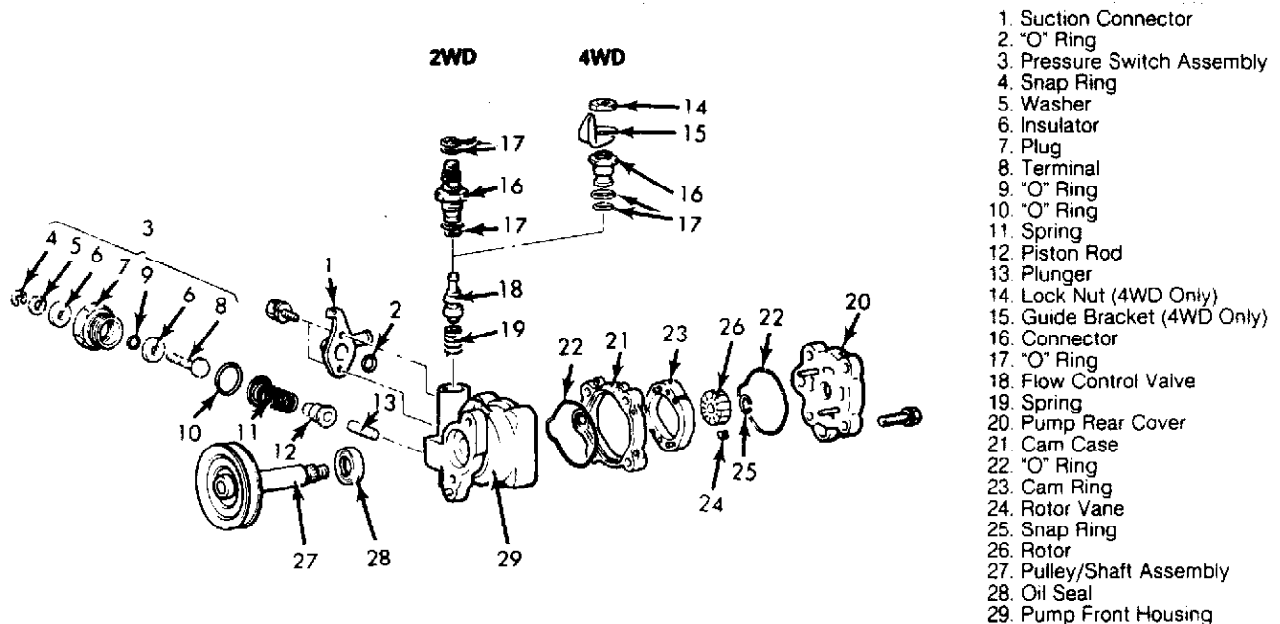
Exploded View Of Power Steering Pump (All Models)
